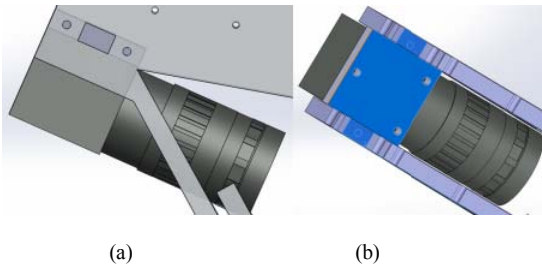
The side view (a) and bottom view (b) of the camera attachments to the curved plates.
